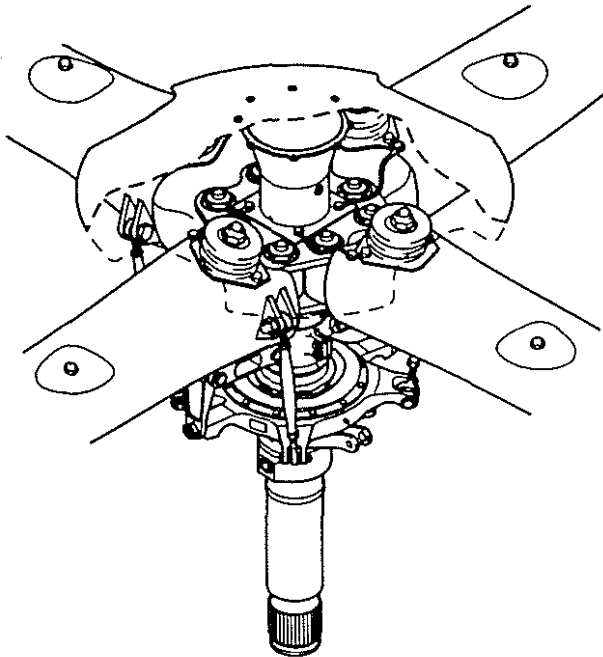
The Inner Part of the EC135 Bearingless Main Rotor System with Elastomeric Dampers
